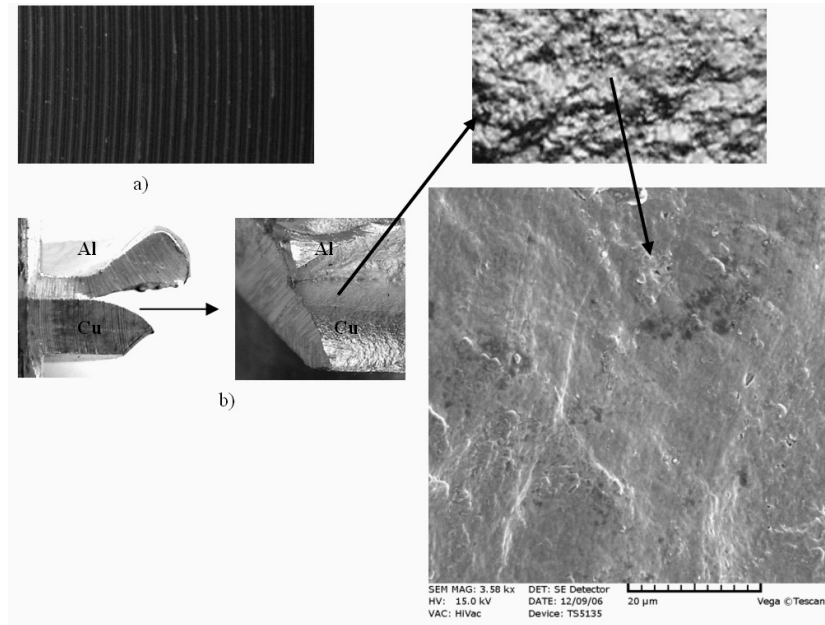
Surface structure (Figure 9b) prepared for cold pressure welding a) and surface structure from the region of the joint b)
